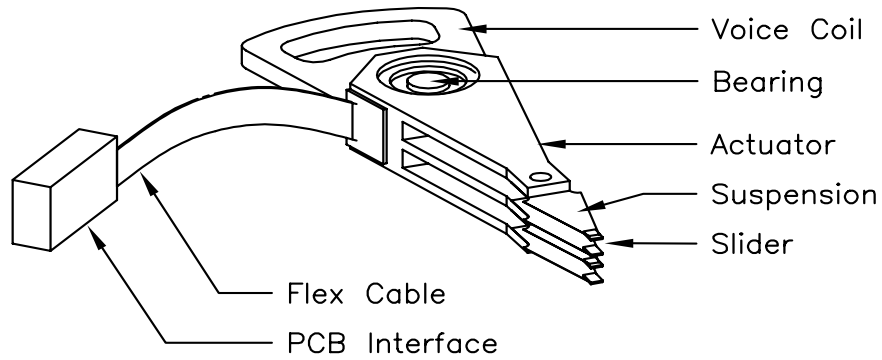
Head stack assembly containing the voice coil, actuator, actuator bearing, suspension, slider, and the flex cable.
